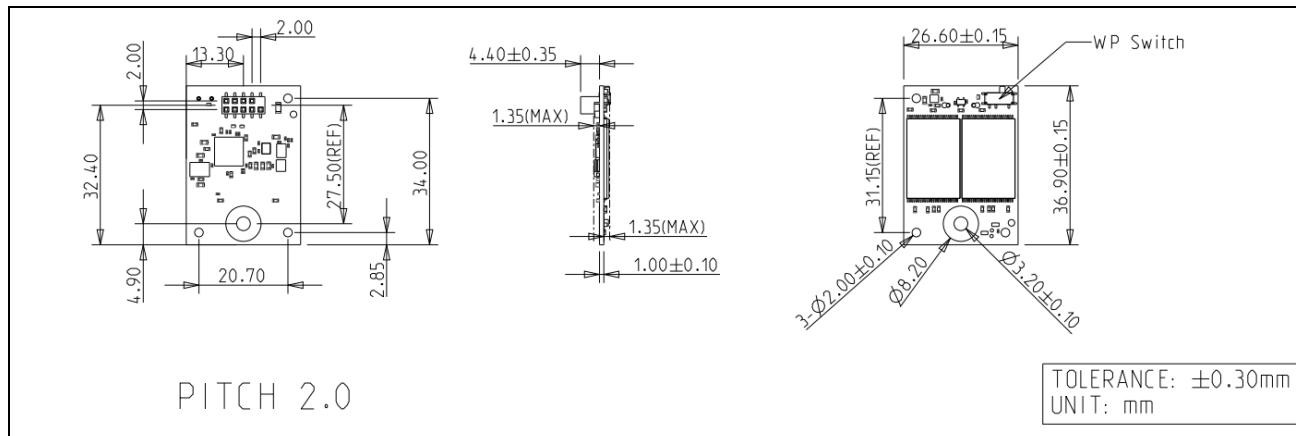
USB EDC Horizontal 2ME3 mechanical dimensions (Pin Pitch: 2.00mm)
